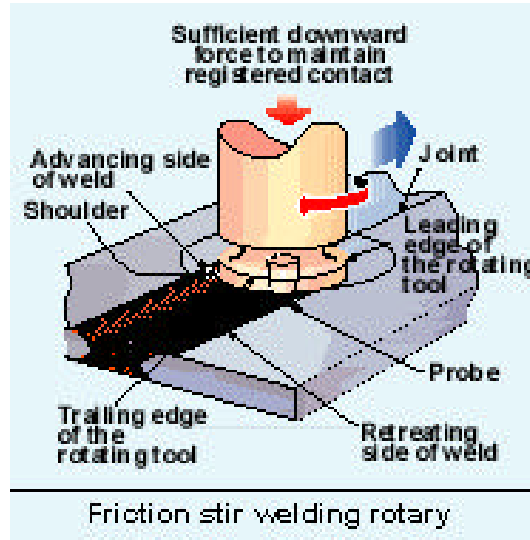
Friction Stir Welding Tool (High Tech Welding 2001)
